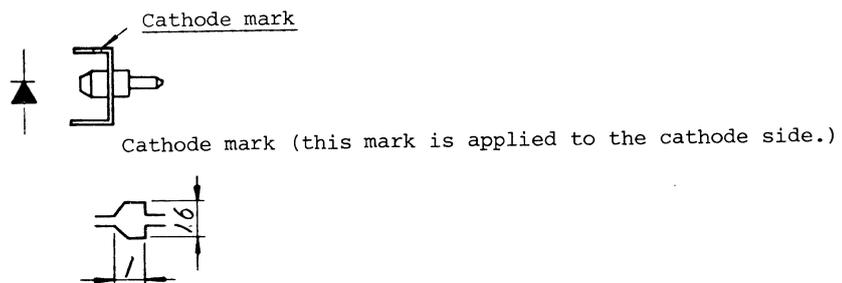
HLSW Circuit Board Assembly (LY-43359)
